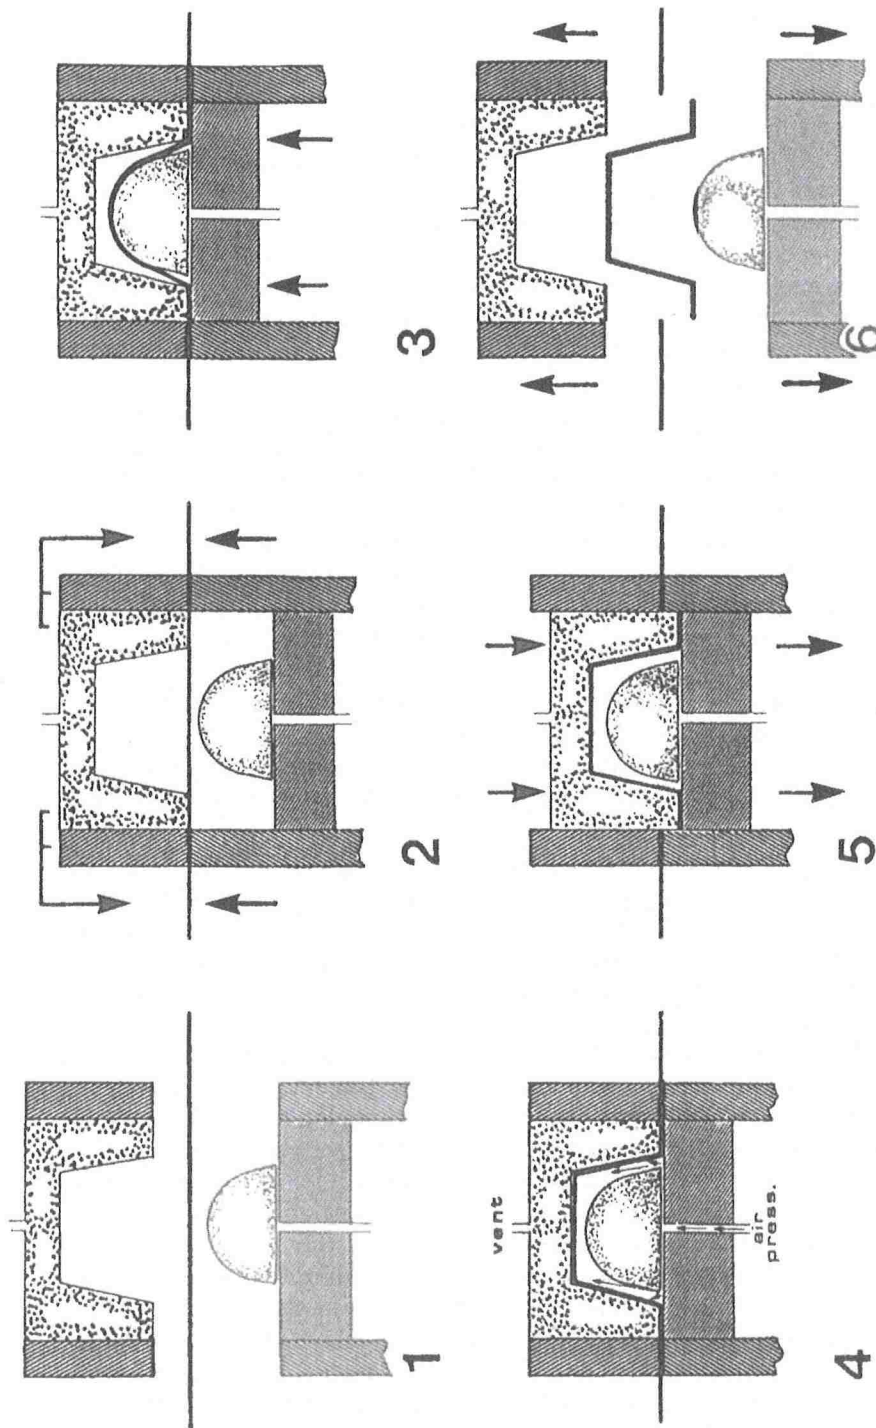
Form-and-trim-in-place forming with plug assist: (1) preheated sheet locating; (2) clamping; (3) prestretching; (4) pressure forming; (5) trimming; (6) mold separation and stripping.
